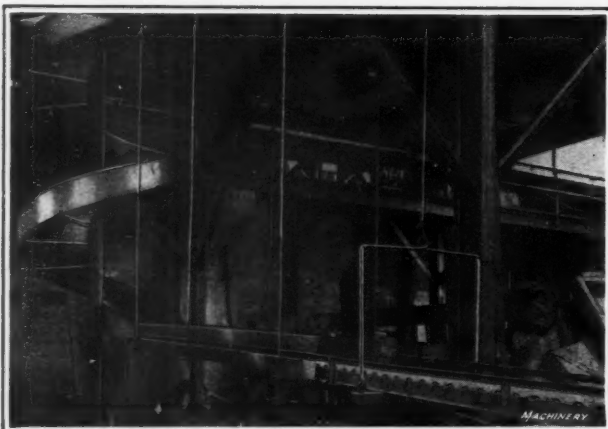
For unloading flywheel castings from freight cars, the Cadillac Motor Car Co. of Detroit, Mich., has a spiral steel chute leading down from the platform on which the load is discharged. The castings are ejected from the chute onto a gravity carrier
